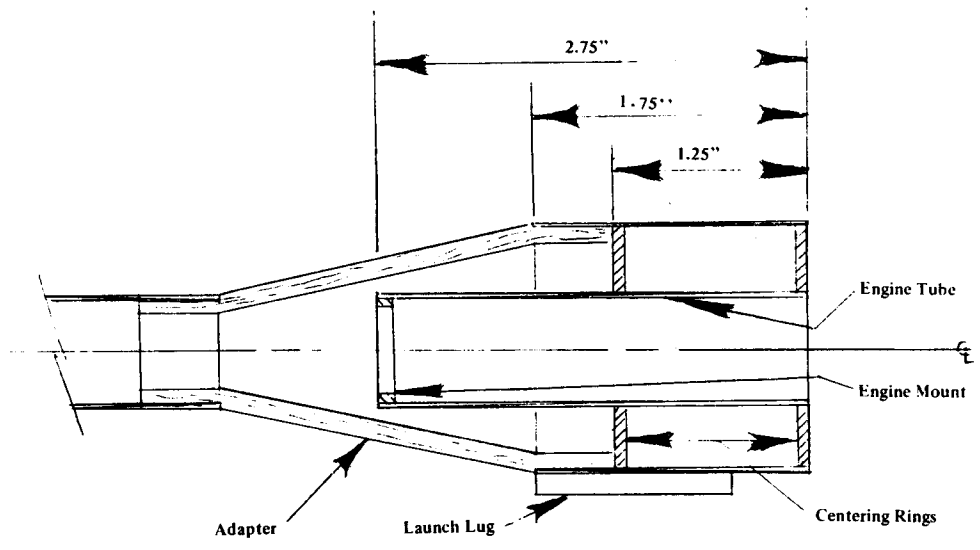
Detailed Section View of Adapter and Engine Housing
